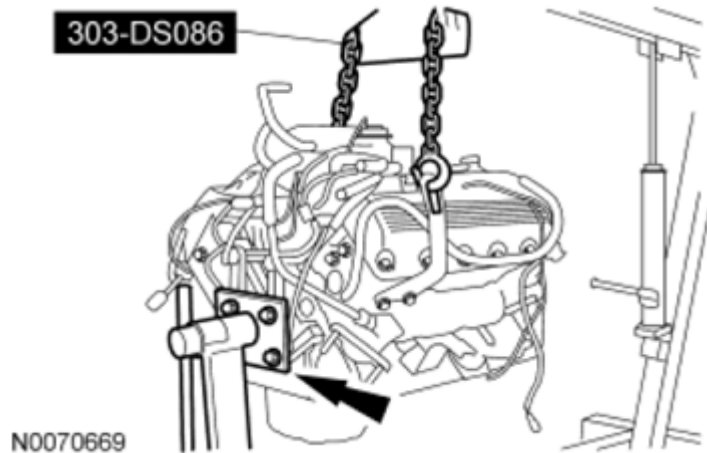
Identifying Engine Lifting Bracket Set (303-DS086)
